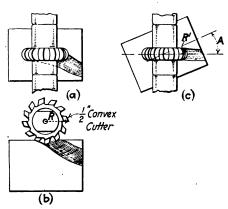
(a) Top view and (b) front view of spiral groove cut without swivelling the table. If the cutter is $2\frac{1}{2}$ in. in diameter, the radius of the groove is about $1\frac{1}{4}$ in., approximately equal to R, the radius of the cutter. Note in (c), which represents the top view with the table swivelled to the angle of the helix A, that the radius of the groove is $\frac{1}{4}$ in. or equal to R', the radius of the curve of the cutting edge.
